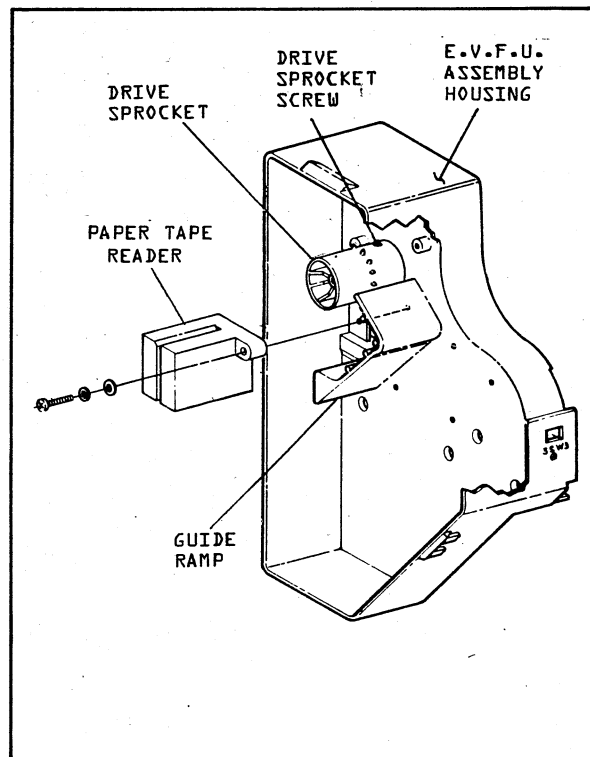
DRIVE SPROCKET ADJUSTMENT
